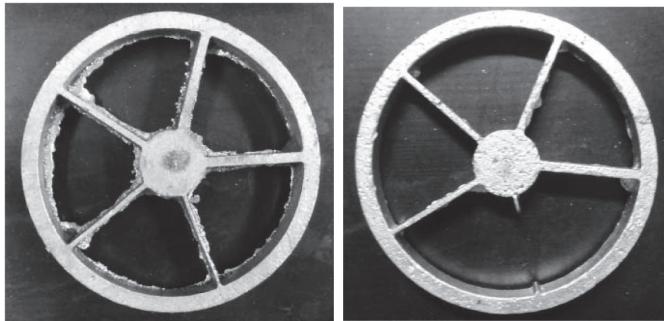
Wheel casting: left- ZA8 alloy, and right- LM6 alloy.
